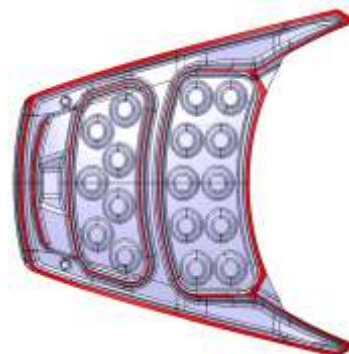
Upper surface of HPPC inner frame showing bonding area (highlighted red).
